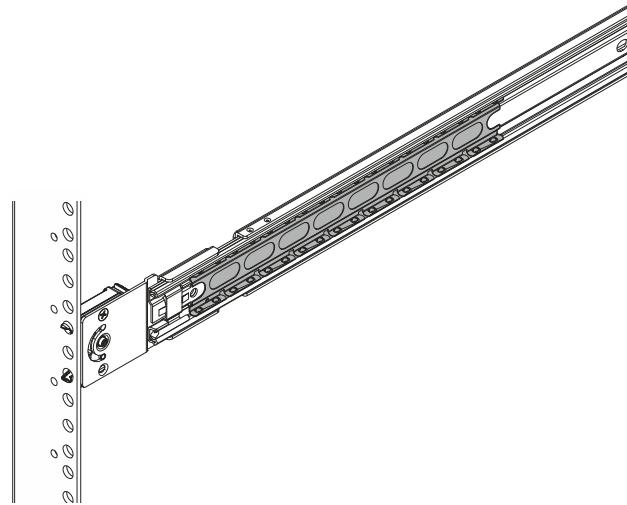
Inserting Rail Alignment Posts into Front Channel Holes
